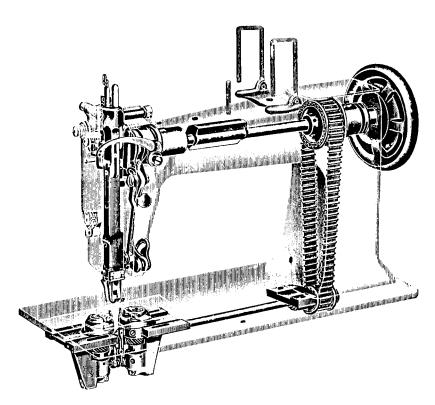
Machine No. 122 w 1. Phantom view showing the interior placement of the working parts in a finished machine
